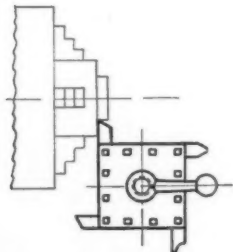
Side of tool is used to take a 1" deep broad-face cut.
